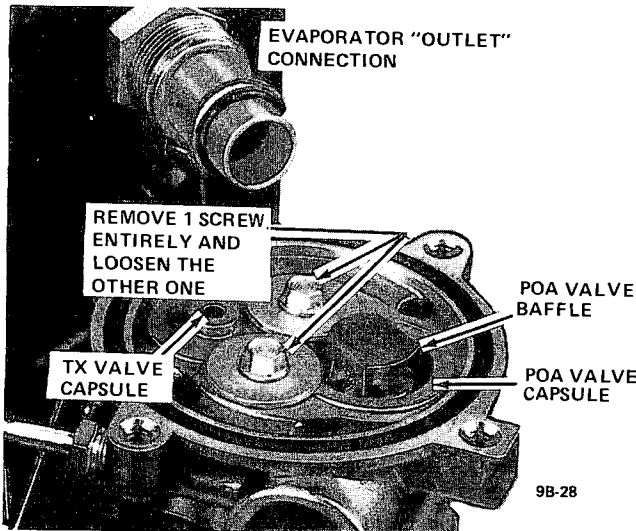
B-17 VIR Assembly with Inlet Connector Shell Assembly Removed
